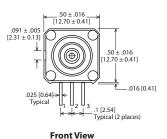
SHA21: Concentric Shafts, Solder Hooks, 2 Potentiometer(s) or RS + PP, 1/4" Bushing
